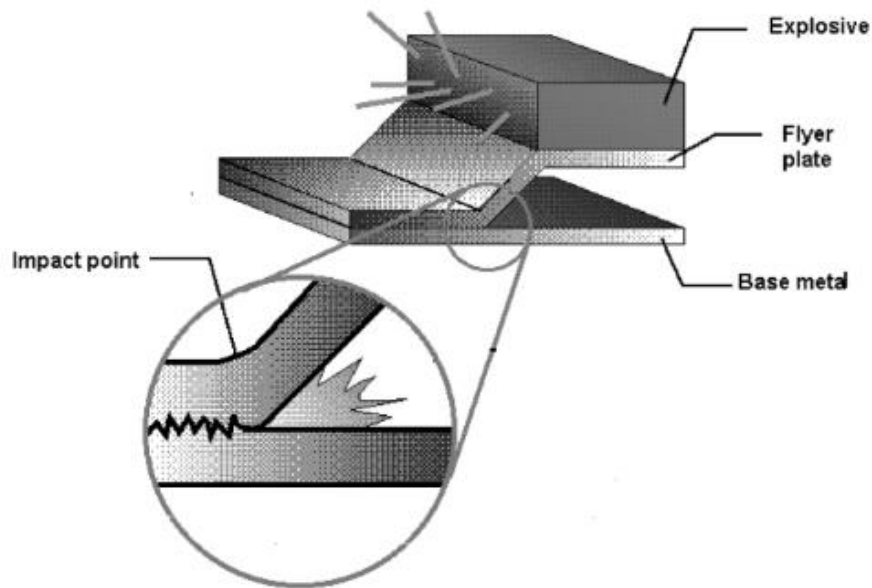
Schematic viewing of the explosive welding[212].
